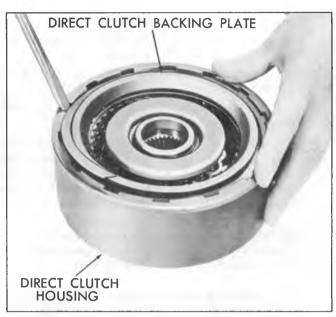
T--Removing Direct Clutch Backing Plate Snap Ring
